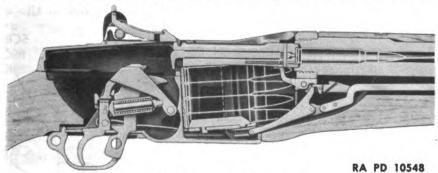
Receiver with Bolt Closed, Cartridge in Chamber, Hammer Locked by Safety — Sectional View
